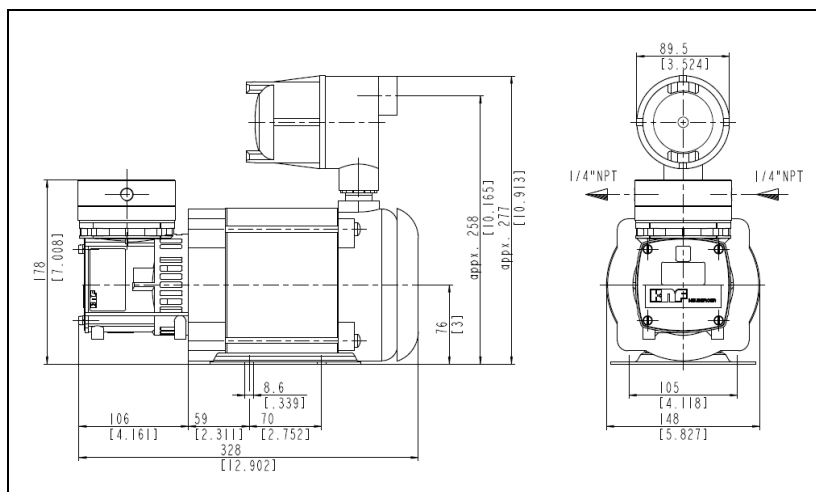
Mounting dimensions UN026S_I EX including .9 versions (All dimensional tolerances conform to DIN ISO 2768-1, Tolerance Class V)
